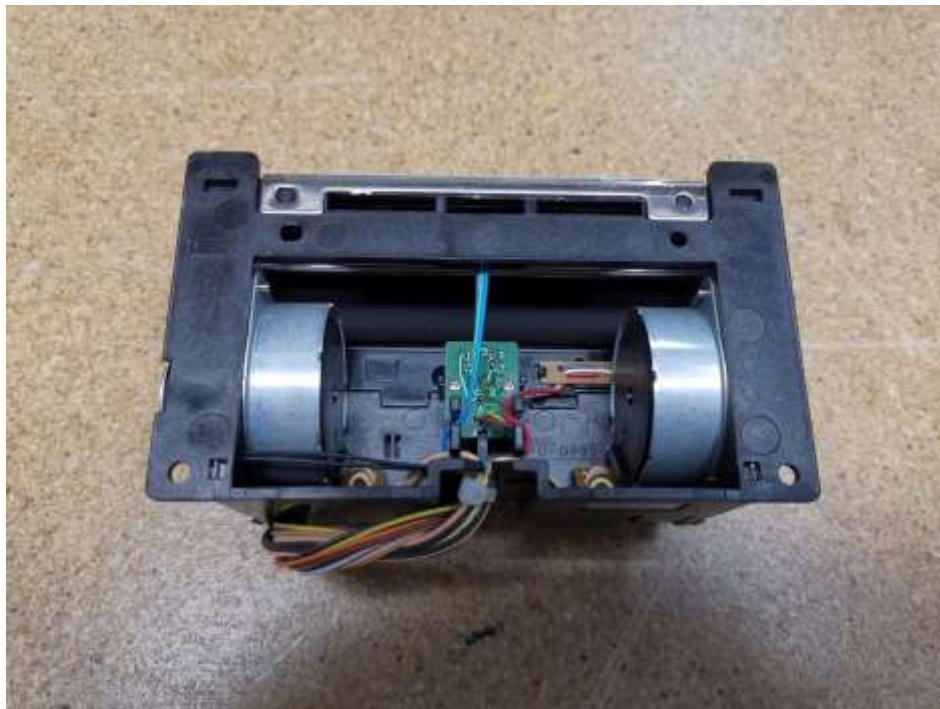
Internal circuit board of the printer assembly, CAPM347
